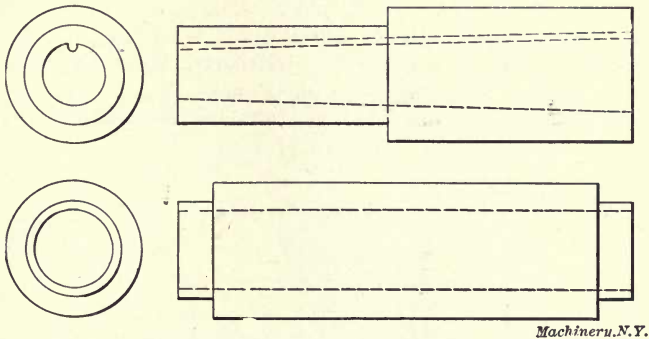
Lead Lap with Two Diameters; Method of Preventing Bell mouthed Holes
